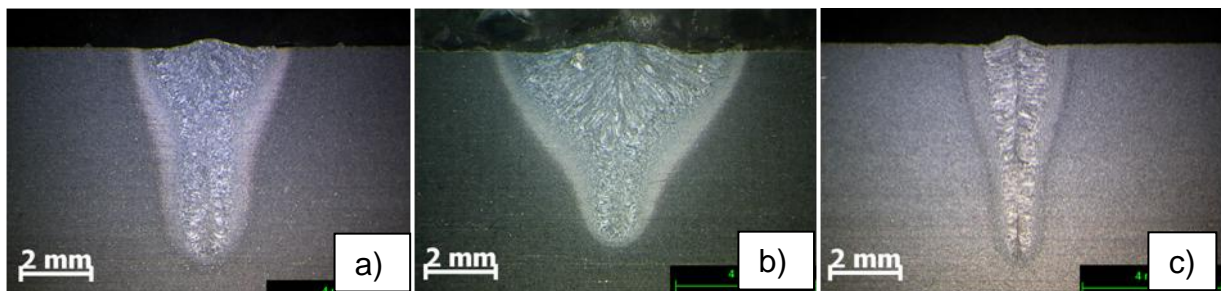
Macrographs for combination of parameters required for 6 mm depth of penetration: a) laser welding 4 kW , 1 m min^{-1} (240 J mm^{-1}); b) hybrid welding 7 kW , 1 m min^{-1} (420 J mm^{-1}); c) laser welding 7 kW , 3 m min^{-1} (140 J mm^{-1})
